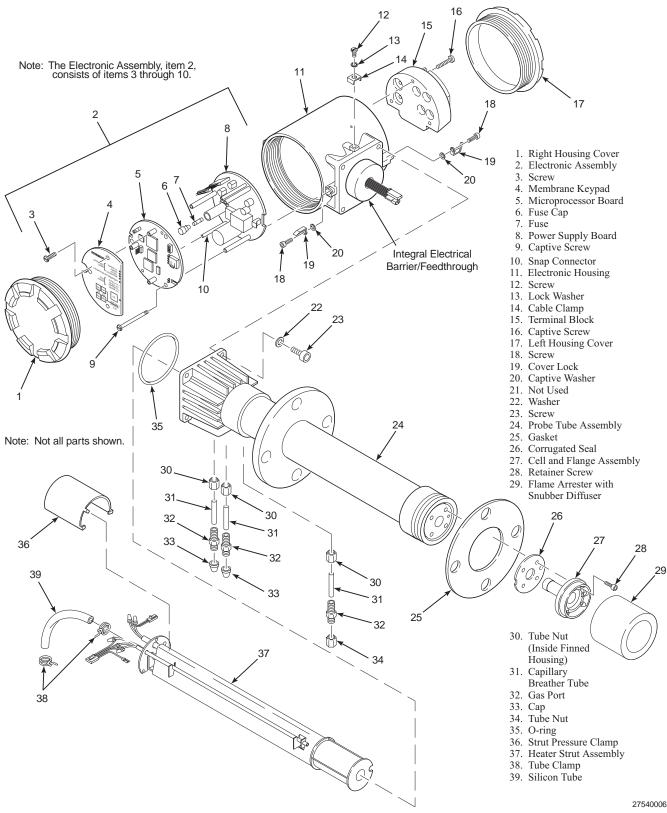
Hazardous Area Oxymitter 4000 Exploded View
